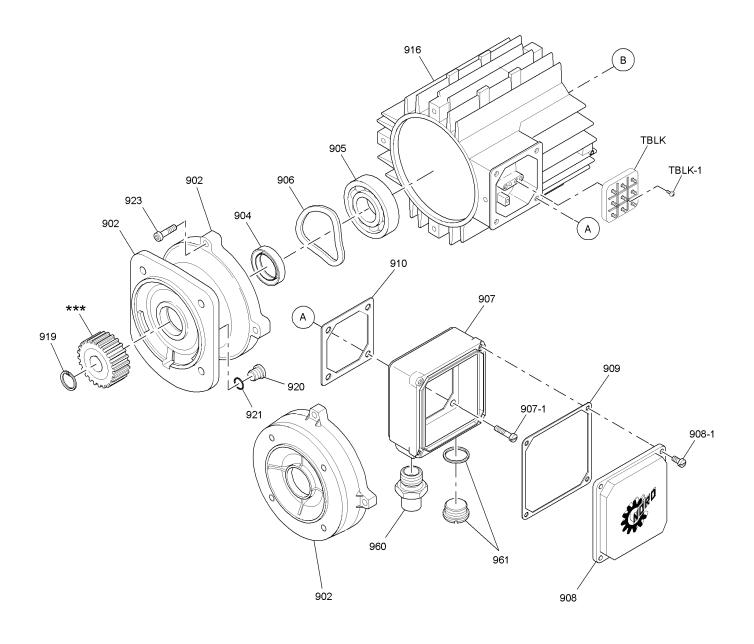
General Motor Exploded View and Generic Parts List (Sheet 1 of 2)
